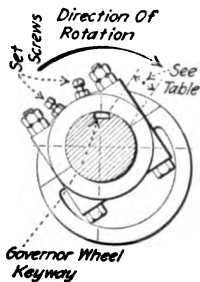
Showing method of locating exhaust eccentric on shaft of Ridgway engine.
